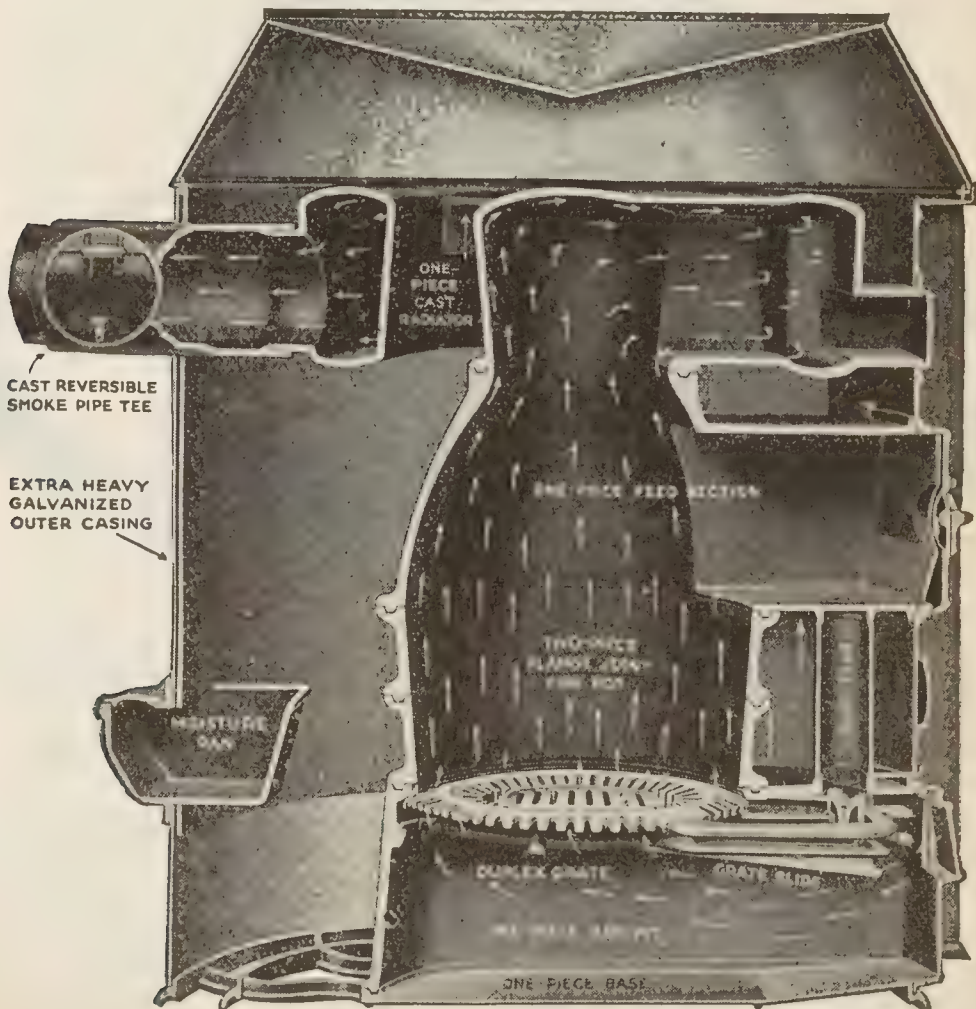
,378.—Favorite warm air furnace showing one piece cast iron radiator, cup joints, shaker and dumping grates, moisture pan, etc.
